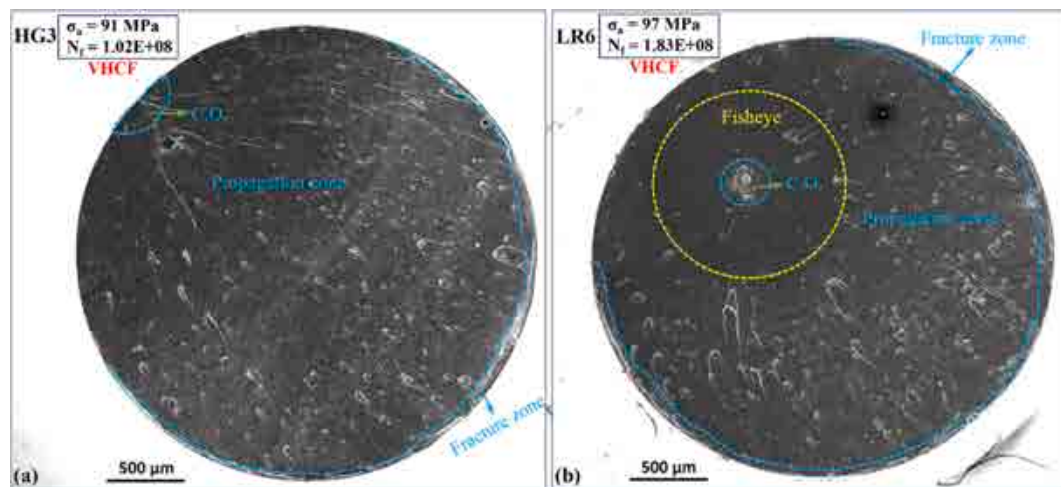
Fracture surface morphology of the specimens failed in the VHCF regime: (a) Hourglass (HG3) (b) Large rod (LR6). C.O.: crack origin.
